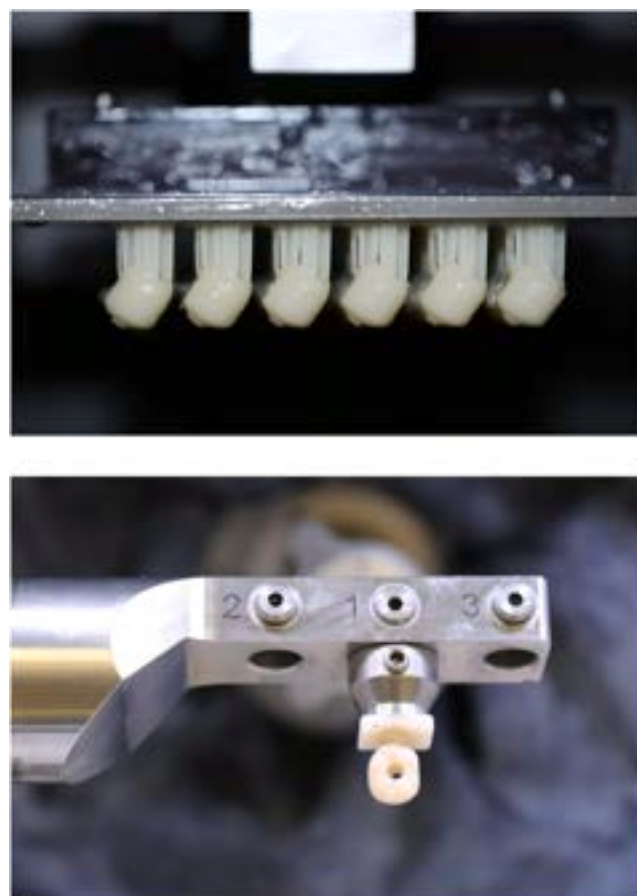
Fabrication of the crowns: Printed objects on the construction platform immediately after the printing process, the support structures must be removed as part of the postprocessing. (upper) Crown milled from a CAD/CAM block using an automated cutting machine. (lower).
